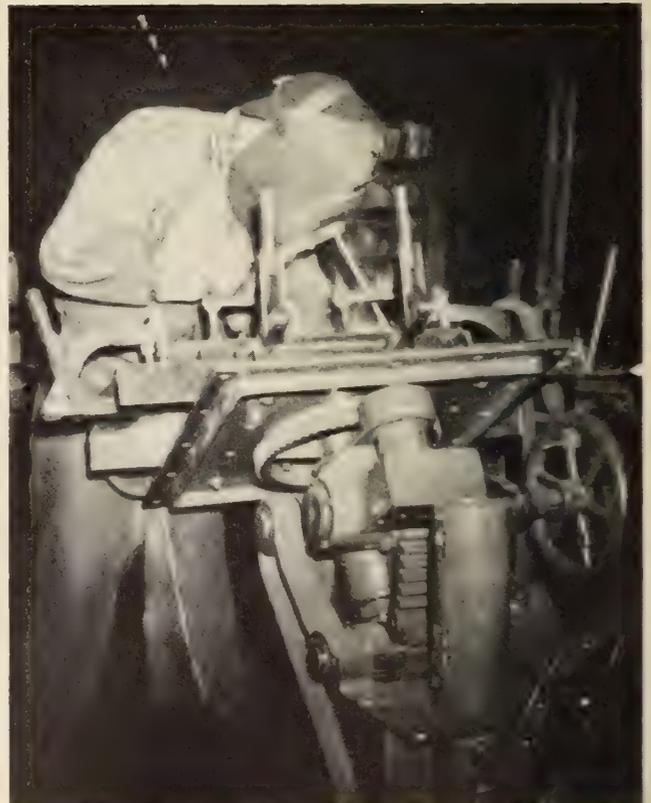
Hand-operated welding positioner used in positioning small sub-assembly weldments.
